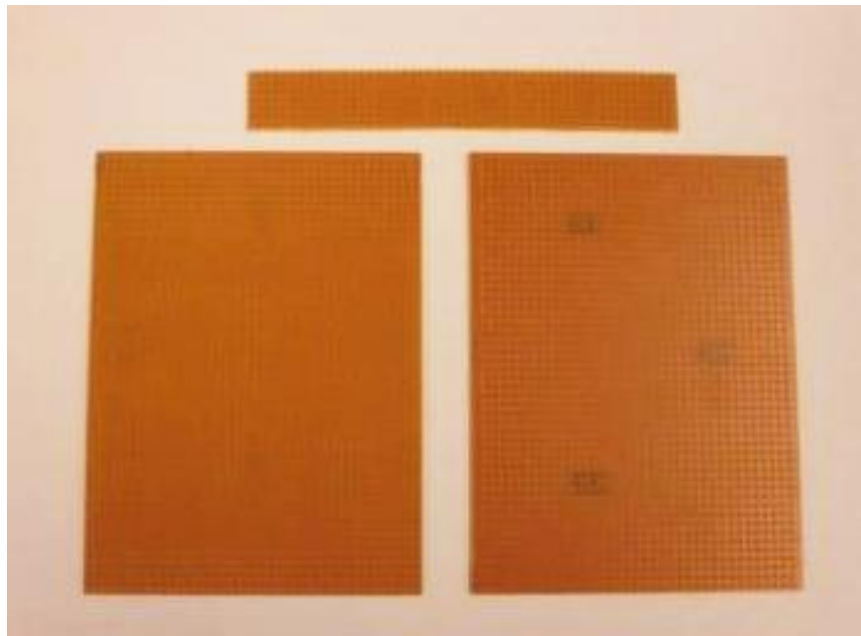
PCB SUPPORT BOARD ELEMENTS
